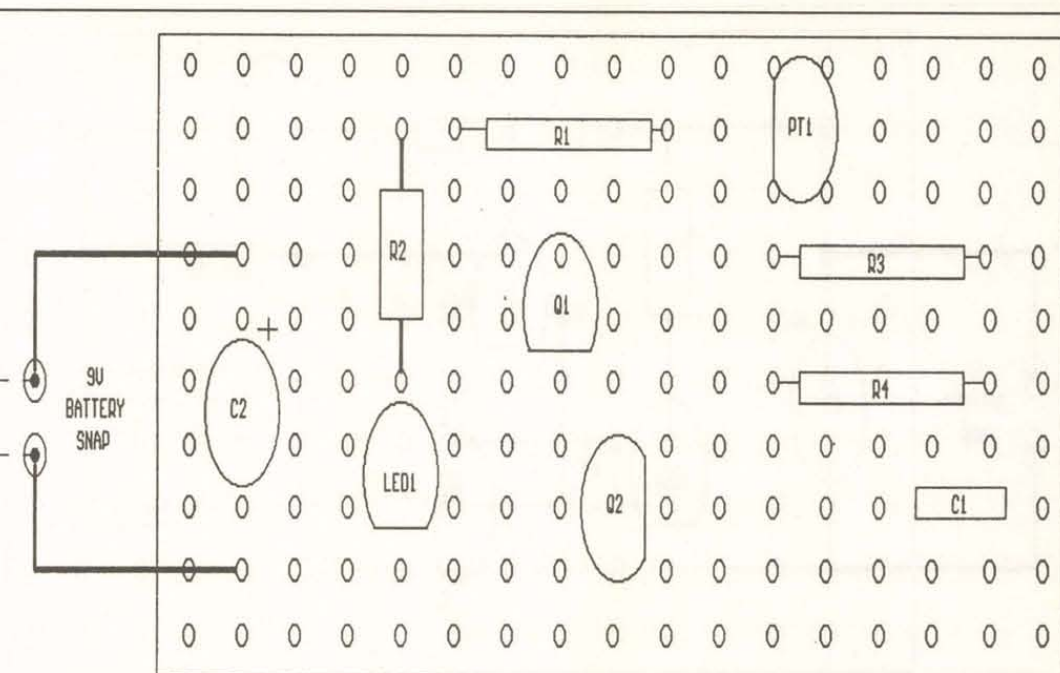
Enlarged view of parts layout on 0.1-inch spaced perforated board.
